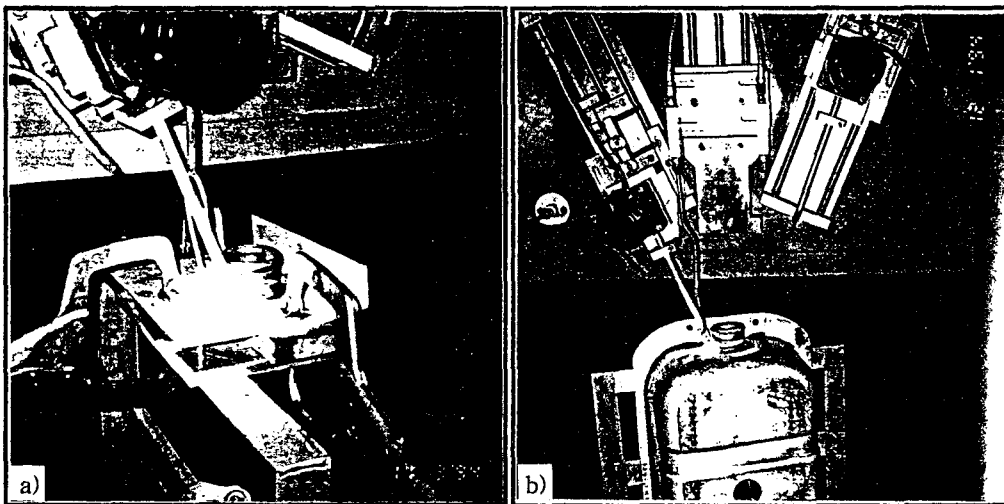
Appearances of torch brazing based on optimum brazing conditions
